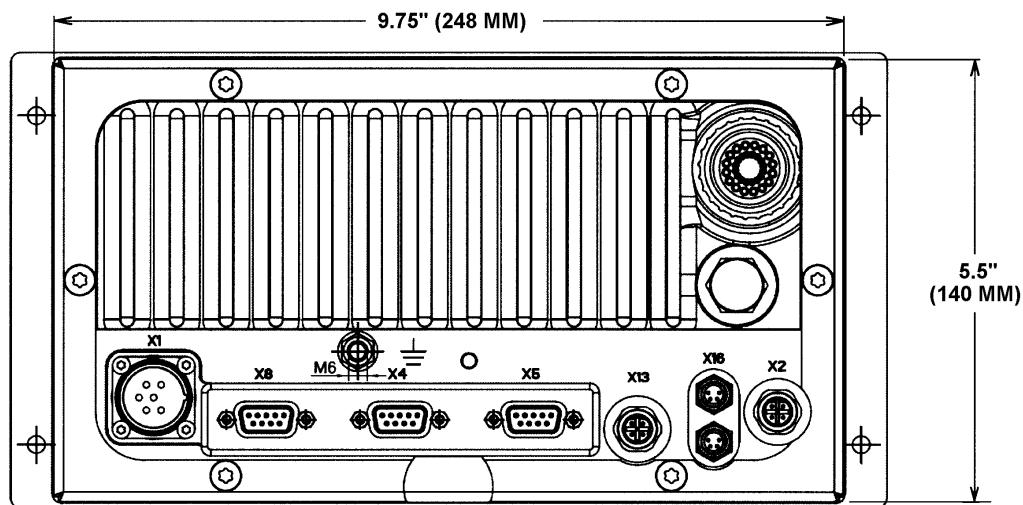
ADU/TWC Interface Dimensions, Rear without Connector(s)
